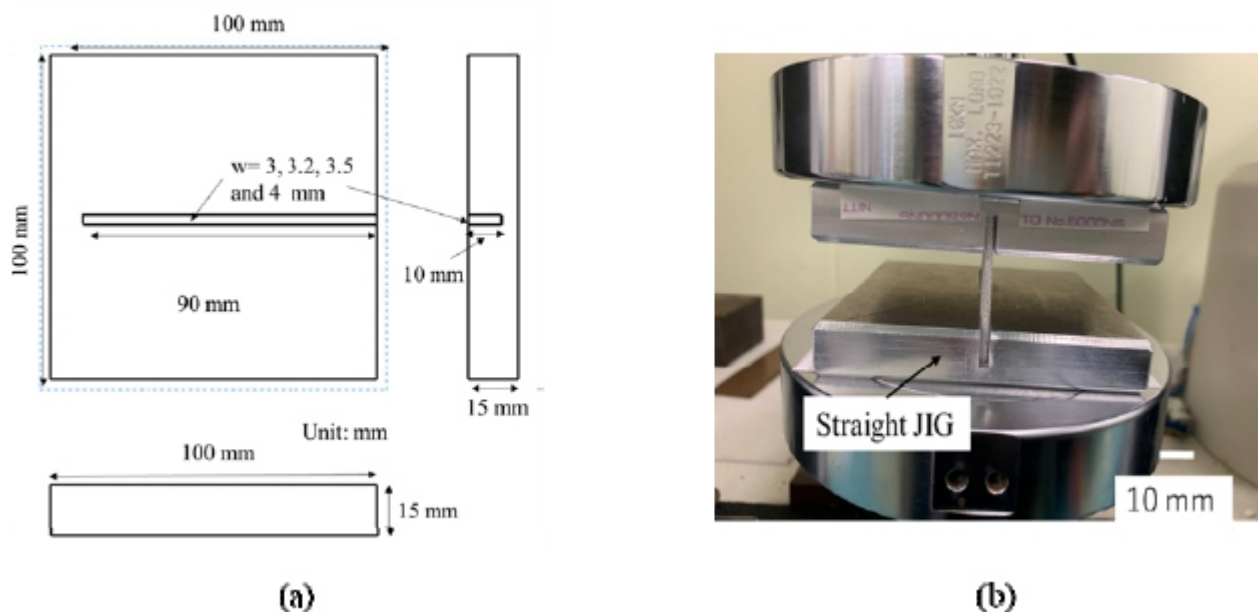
Experimental apparatus of in-plane compressive test of a straight panel of GFSS. (a) A half of edge holder of straight panel of GFSS, (b) Setup of straight panel on upper/lower edge holders.
